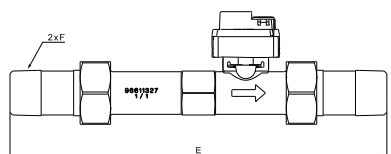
Dimensions, VFS, 5-100 l/min, with adapters
